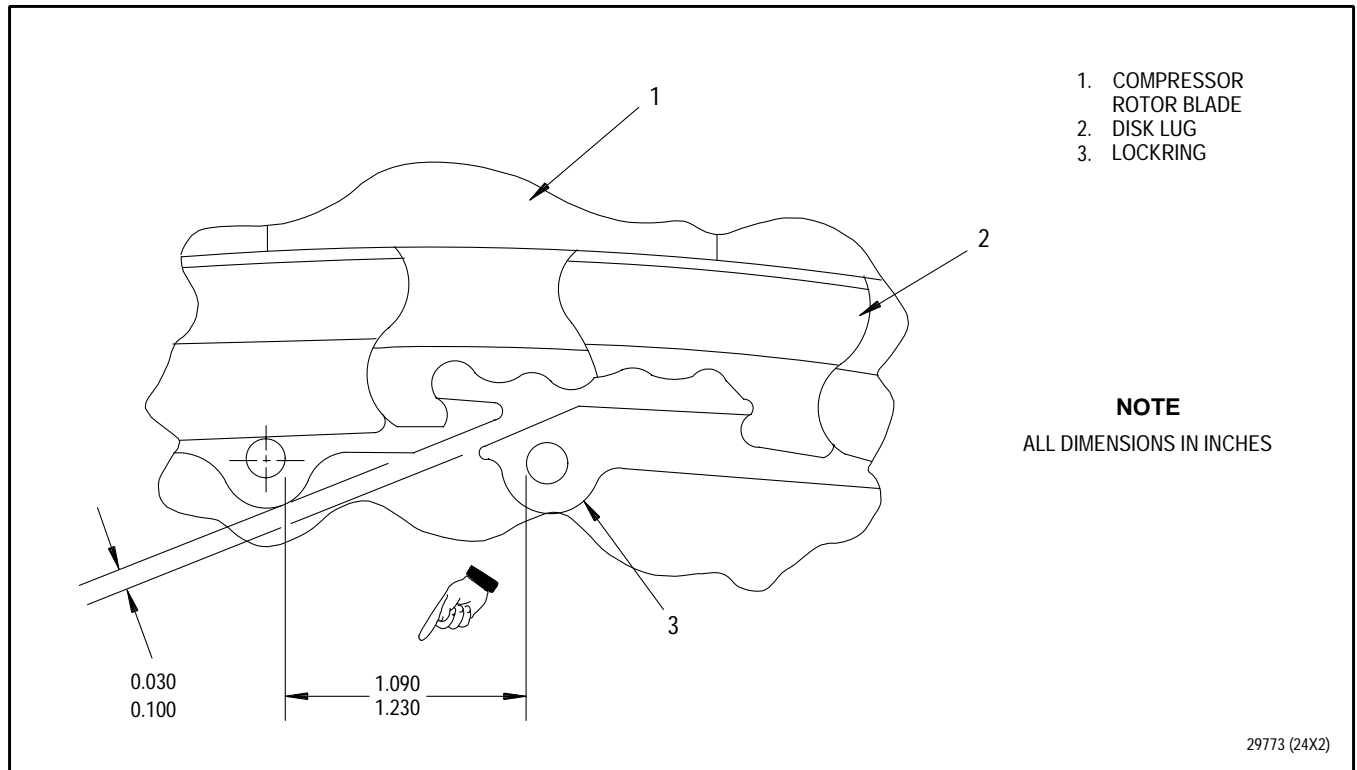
Sixth and Seventh Stage Blades - Lockring Measurement (Typical)
